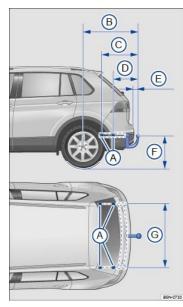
Dimensions and attachment points for retrofitting a trailer hitch.
